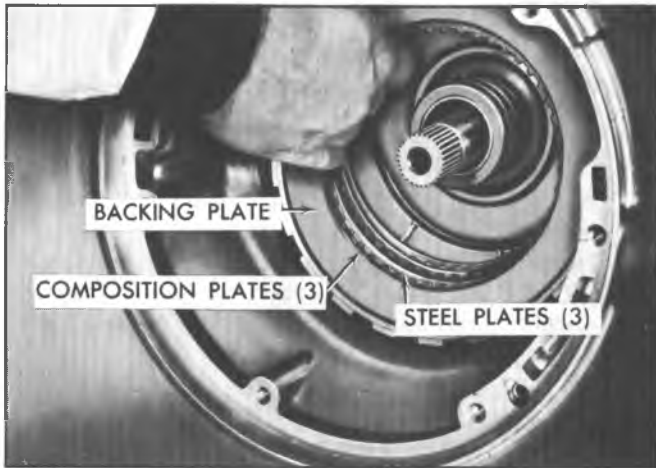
B—Installing Intermediate Backing Plate and Clutch Plates
